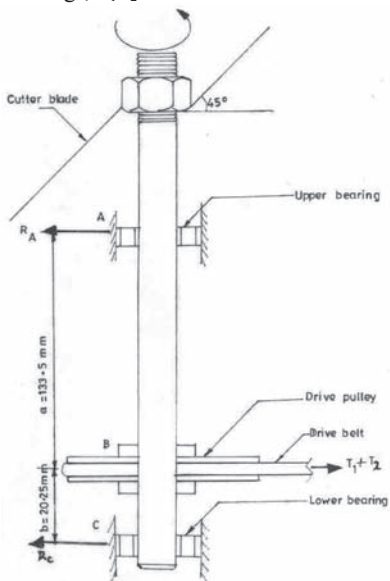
Diagram of the rotor shaft showing the positioning of the cutter blade. A, C Bearings; T_1, T_2 tension on the belt
